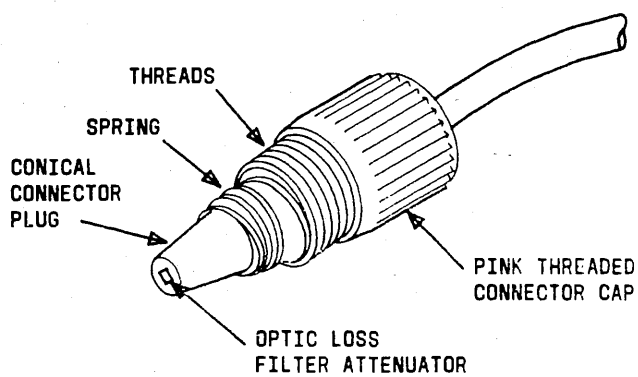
Modified Pink Connector Plug of LA1A-D Cable-Type Lightguide Build-Out
